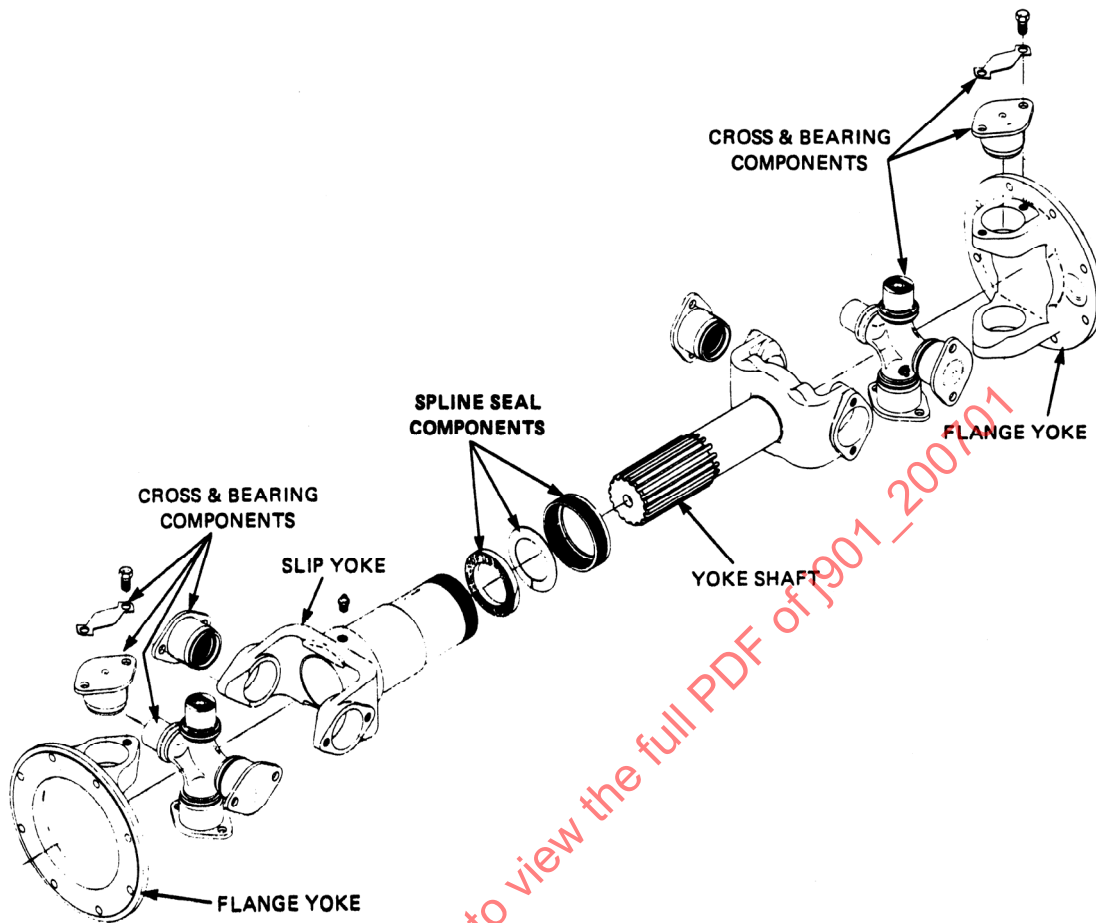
TYPICAL SHORT COUPLED DRIVESHAFT
